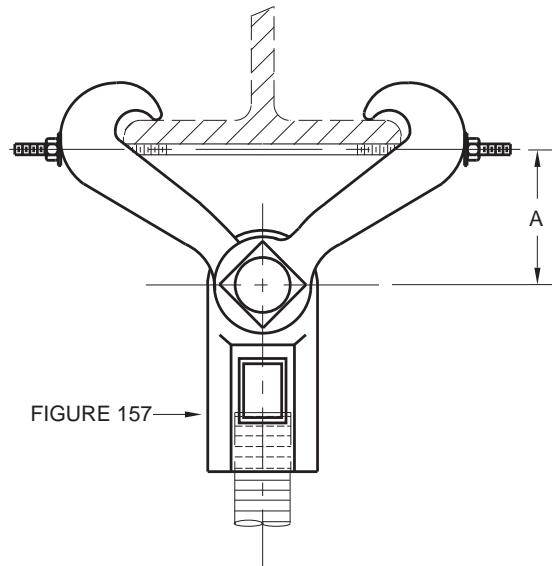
ADJUSTABLE BEAM CLAMP
